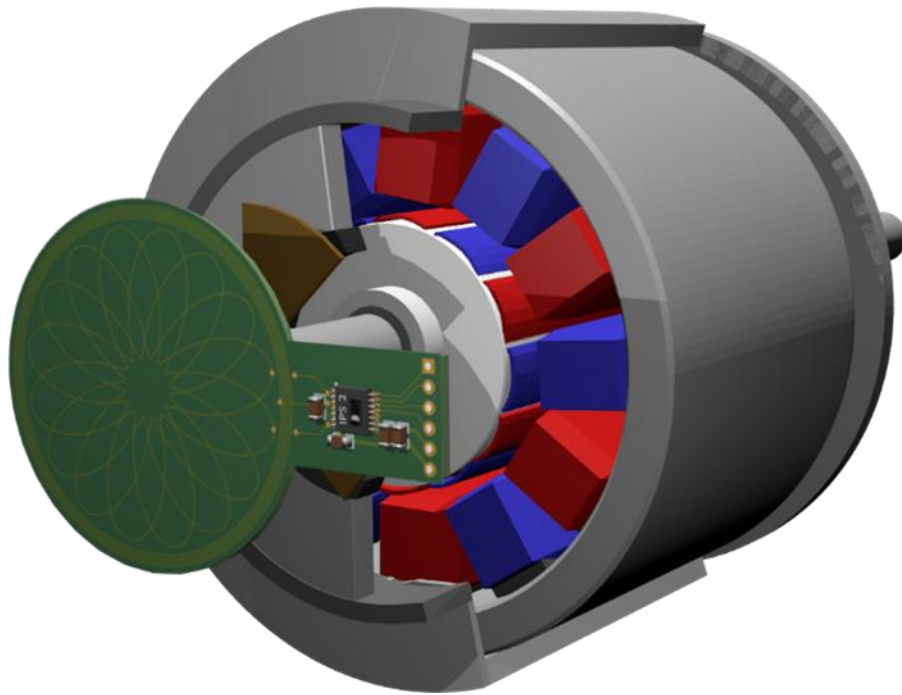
Example of an End-of-Shaft Rotary Coil Design
